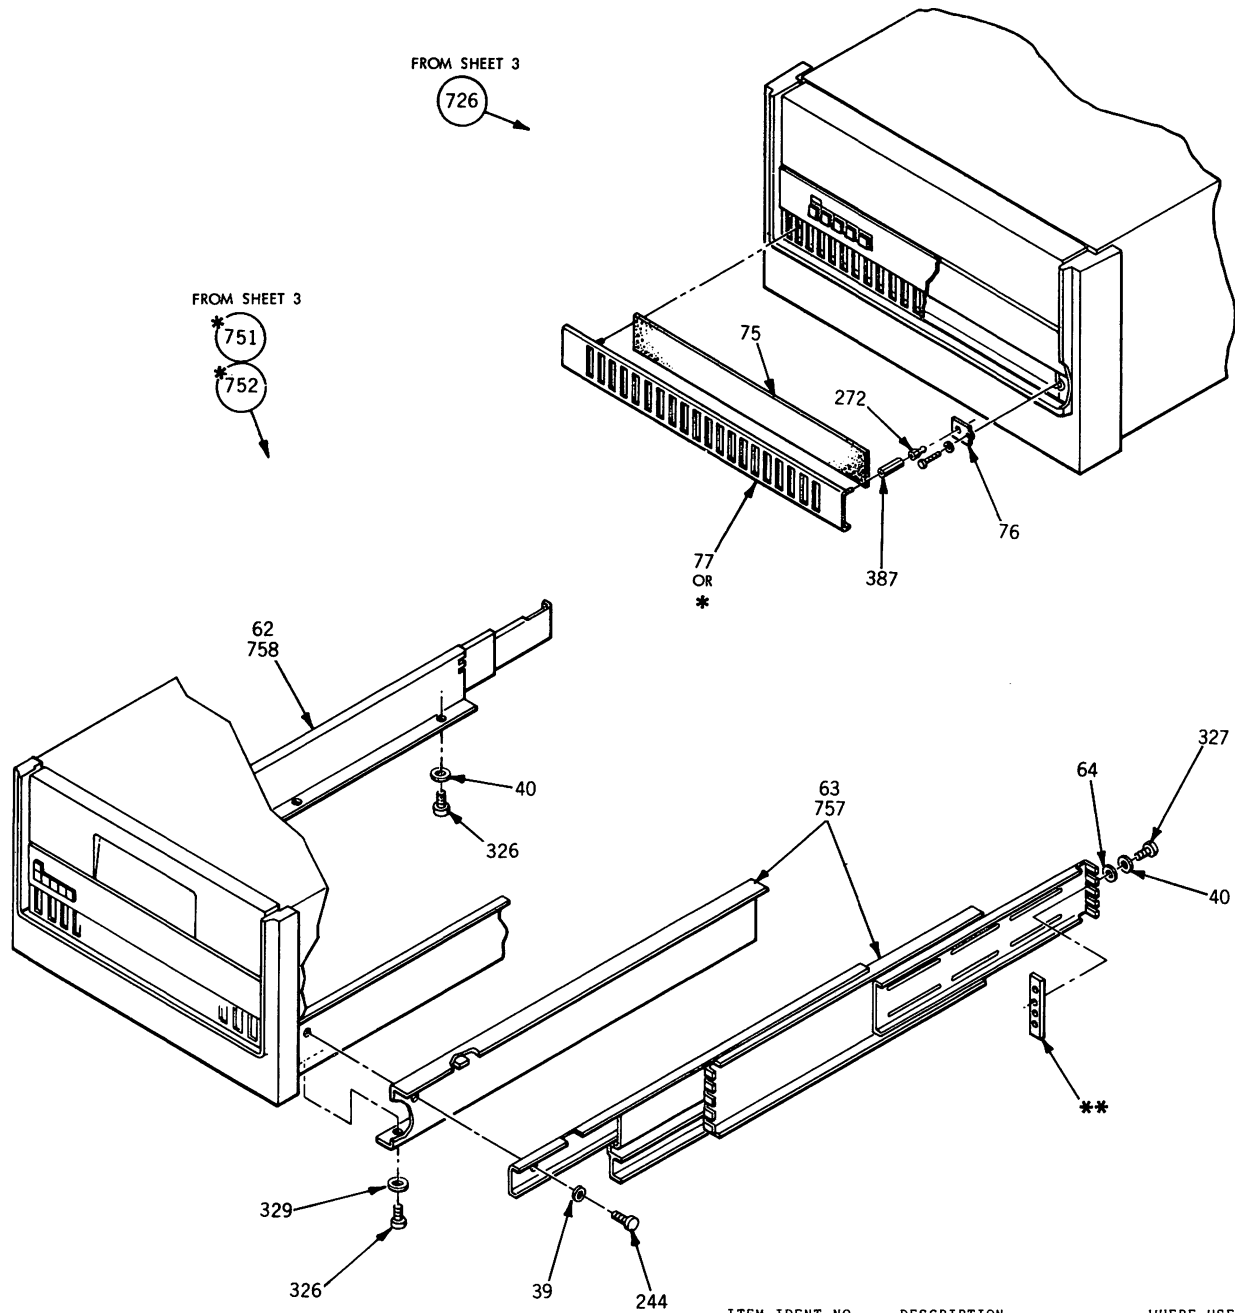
POWER SUPPLY ASSEMBLY
